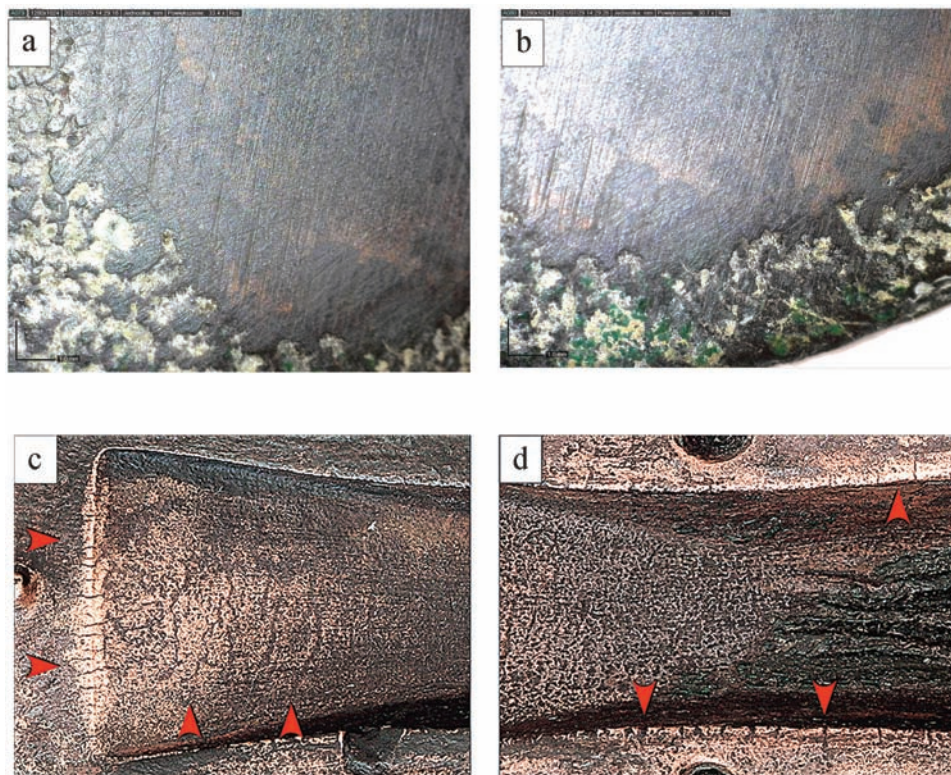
Traces of wear on the analysed metal casting moulds: a–b – microscopic images showing abrasion on the outer surface of the casting mould from Roska (photo by K. Nowak); c–d – thermal fatigue cracks resulting from high-temperature exposure (according to Kowalski *et al.* 2019, fig. 8:a–b). Prepared by K. Nowak.
